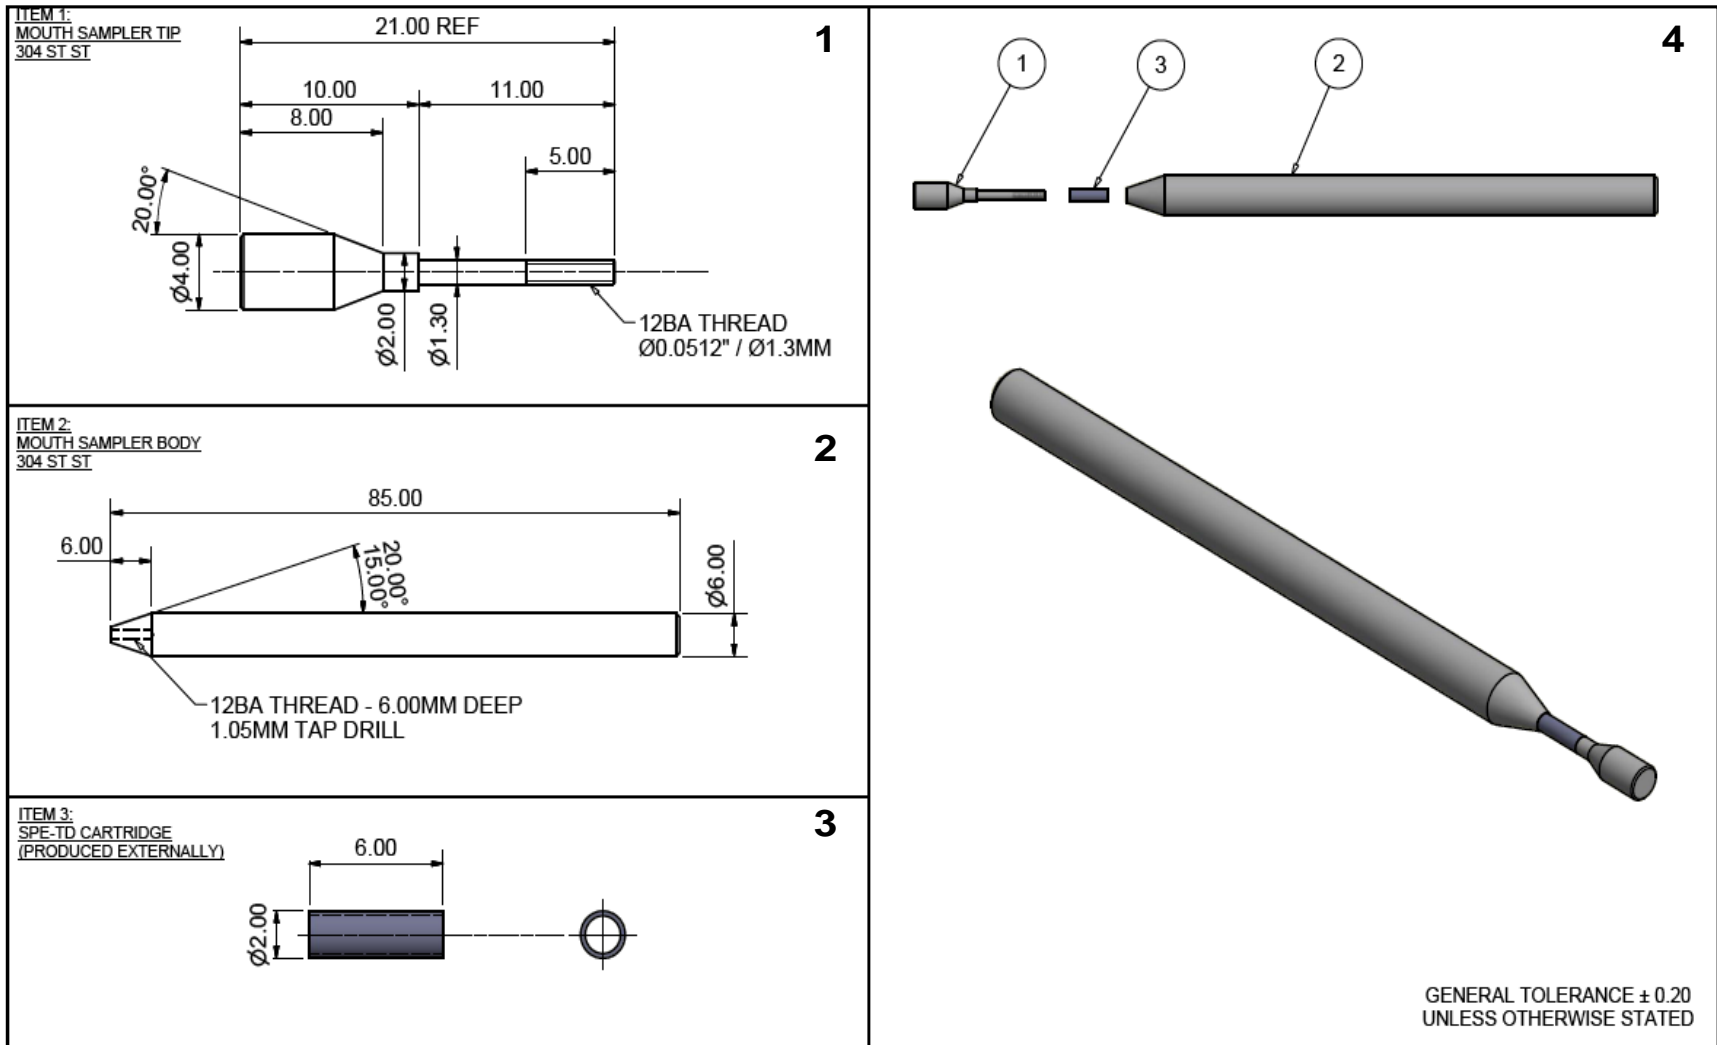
Computer aided design (CAD) drawing of the saliva sampler and component parts, all dimensions are in mm unless otherwise stated. Panel 1: Drawing of the sampler head and spindle, 2: drawing of the sampler handle into which the head is screwed, 3: the SPE-TD cartridge, a hollow titanium cylinder coated with PDMS. Panel 4 shows an exploded diagram of the 3 sampler components, the spindle of part 1 passes through the hollow centre of the SPE-TD cartridge and screws into the handle (part 2). The assembled sampler is shown in panel 4, the SPE-TD cartridge is secured between the sampler head and handle and may be safely and comfortably placed into the oral cavity to effect sampling.
